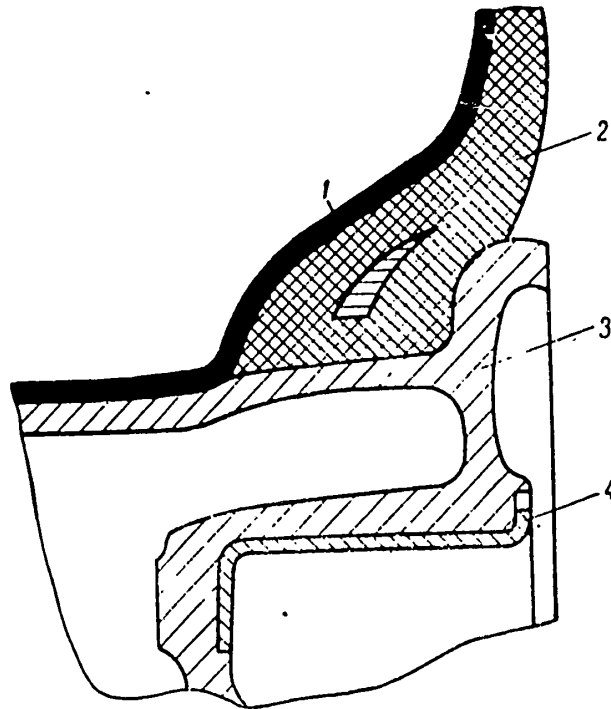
Early Design of an Aircraft Wheel for a Medium-size Aircraft, with the Brake Drum Pressed into the Wheel Body
